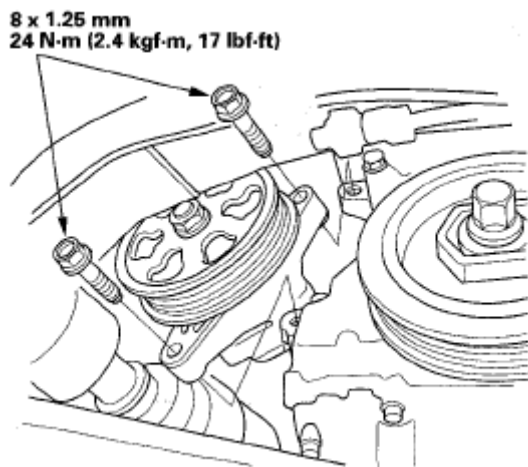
Identifying P/S Pump And Bolts (With Torque Specifications)
